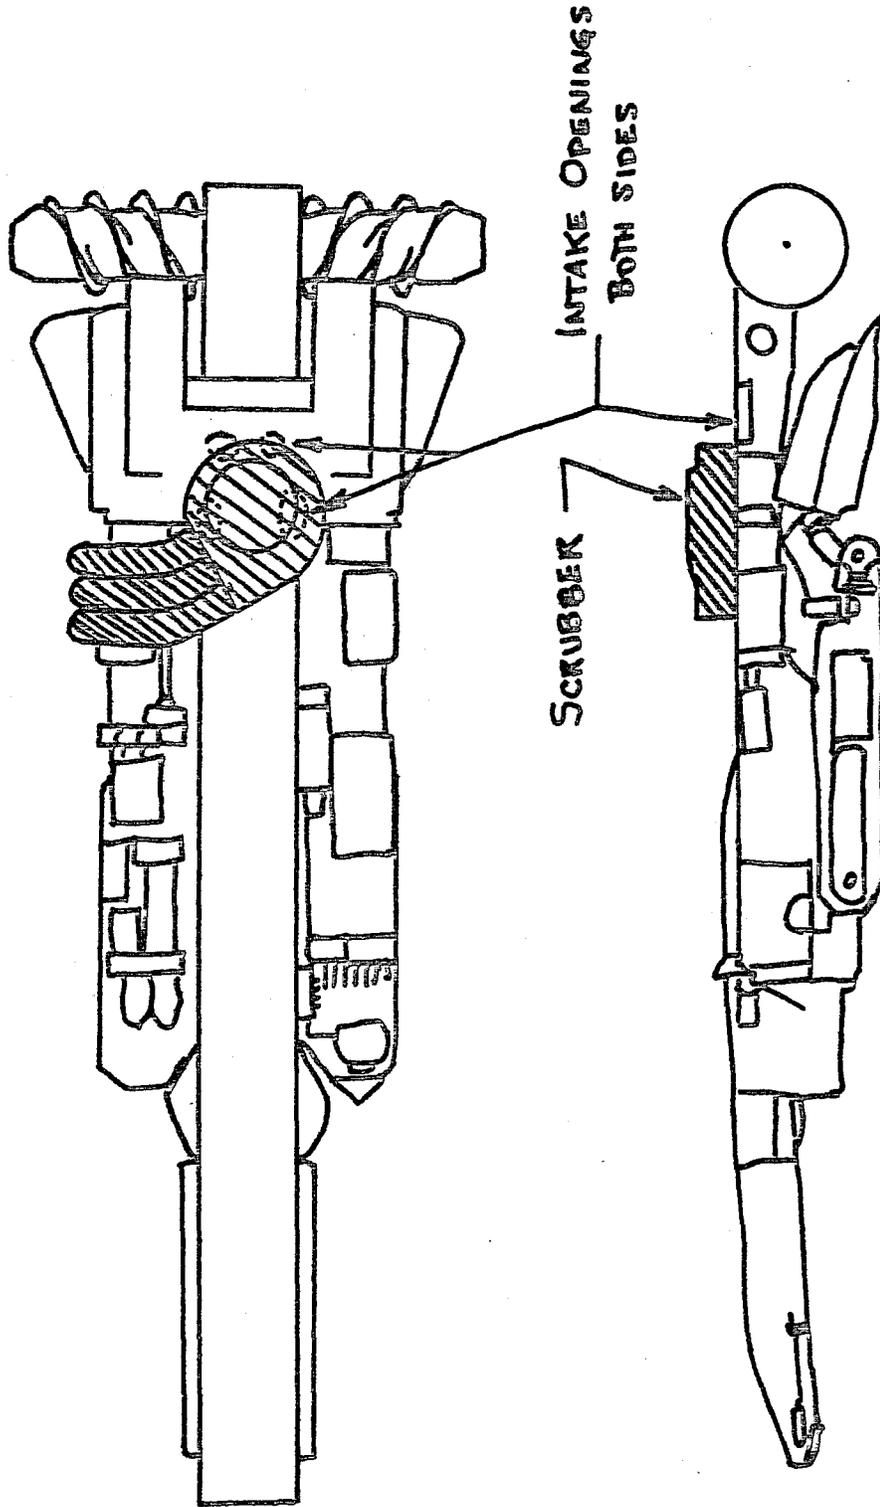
General Arrangement of Experimental Scrubber Mounted on Joy 10CM
